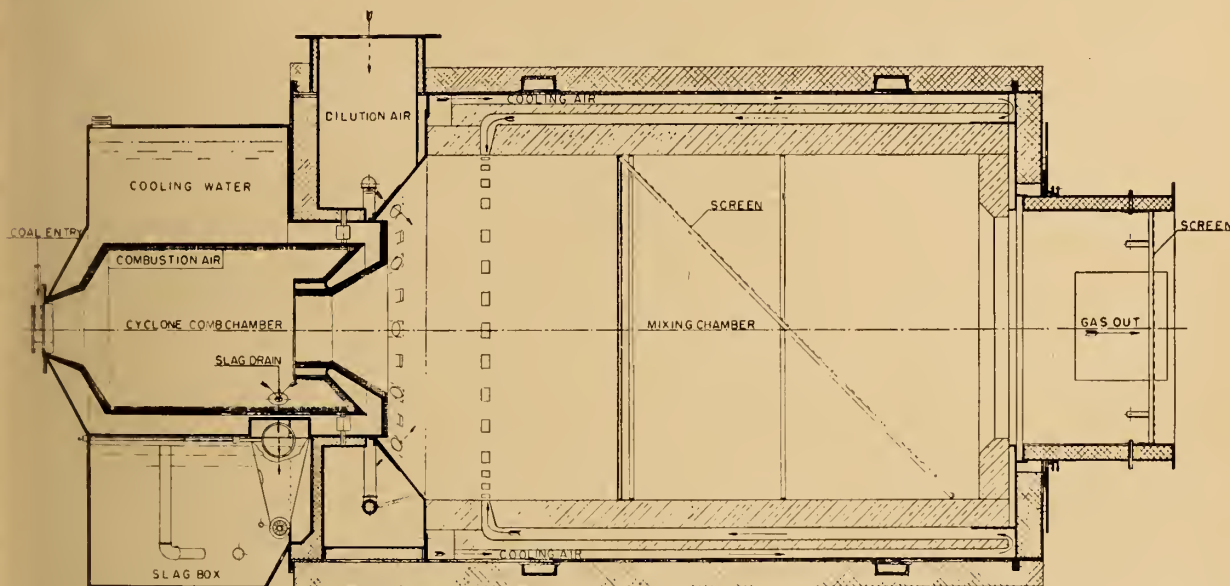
Cyclone combustion chamber of exhaust-heated coal-burning gas-turbine.
